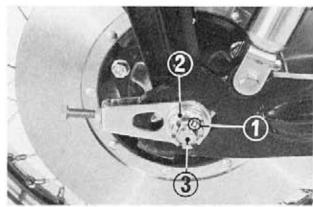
(i) Cotter pin (ii) Axle shaft (ii) Axle nut
